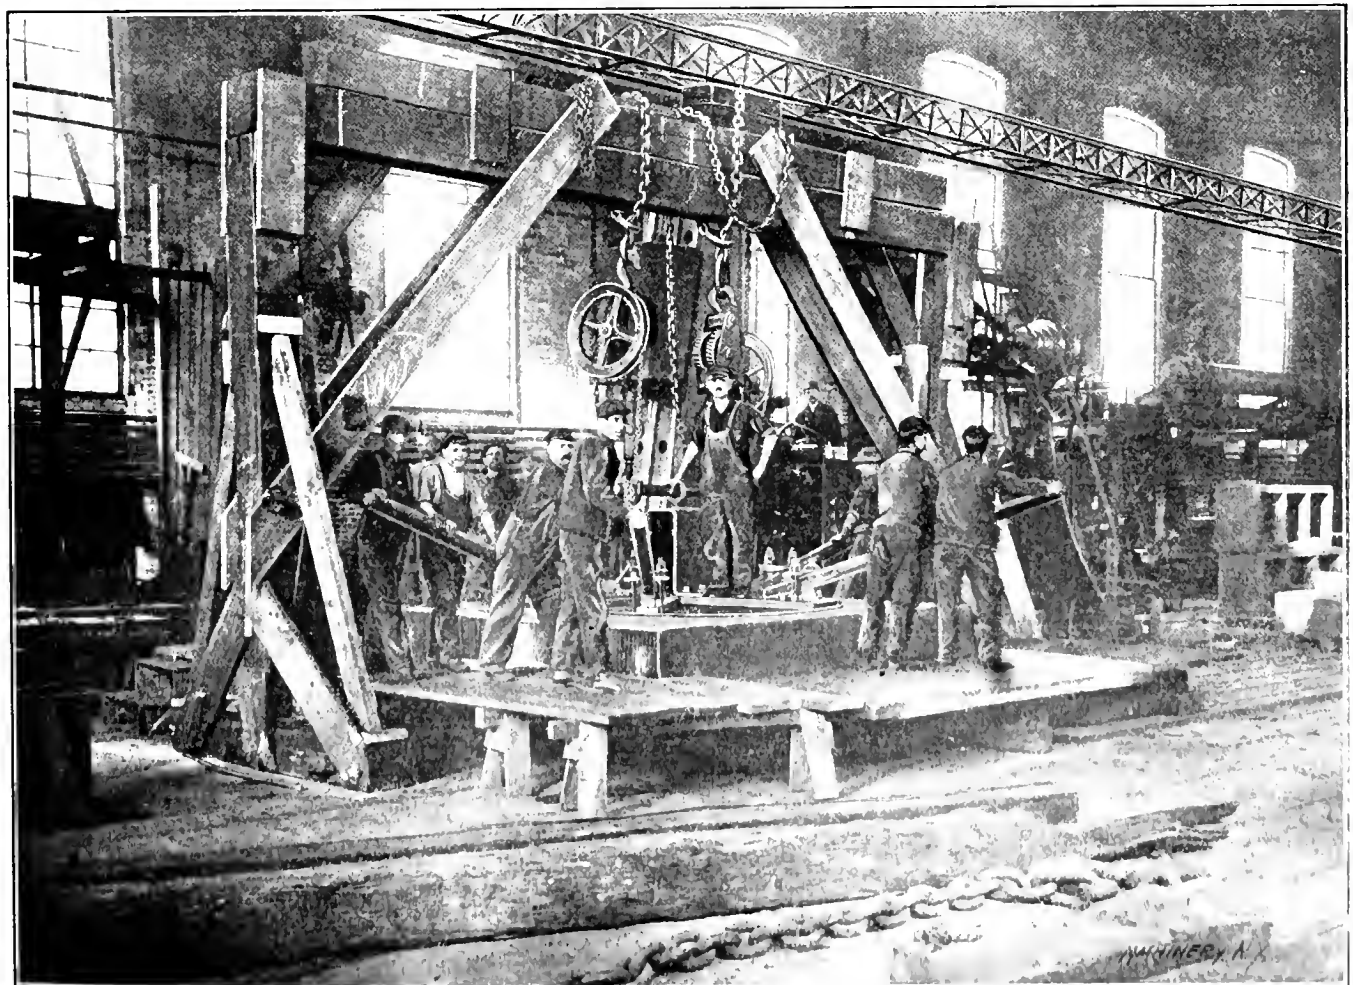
Grinding in the Door into the Door Plate in Case of Valve Grinding on a Large Scale.
